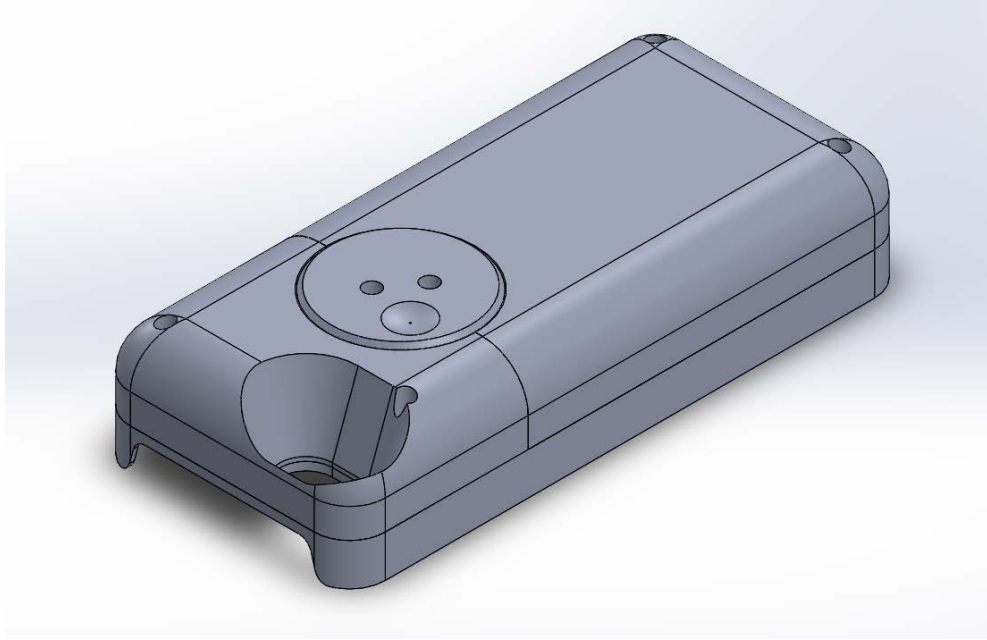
Revision 3: final case design based on sizing prototypes and gear train design
